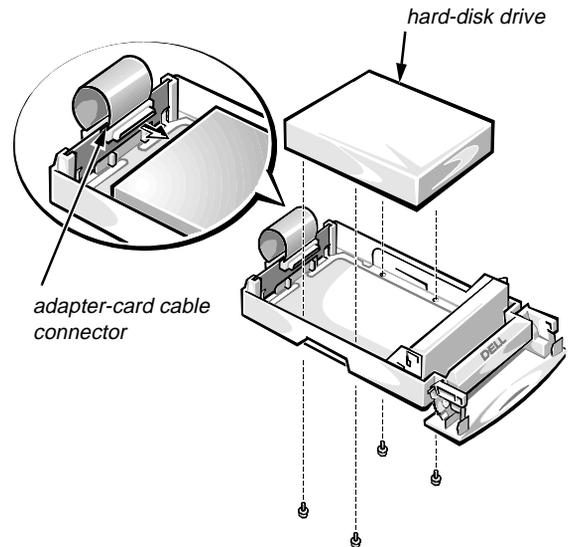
Attaching the Drive to the Adapter-Card Cable Connector
